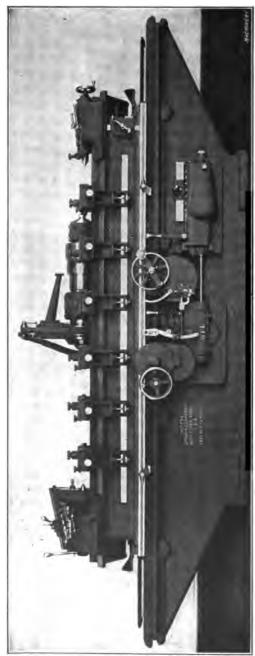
Norton Oylindrical Grinding Machine of the Plain Type
